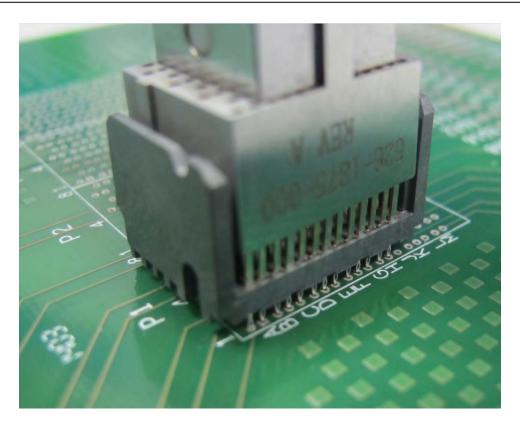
The 4 Pair seating head matches the 4 Pair Backplane module.
